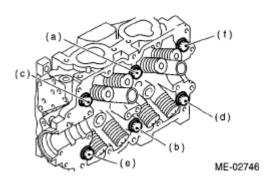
Identifying Cylinder Head Bolts Alphabetical Sequence Courtesy of SUBARU OF AMERICA, INC.
